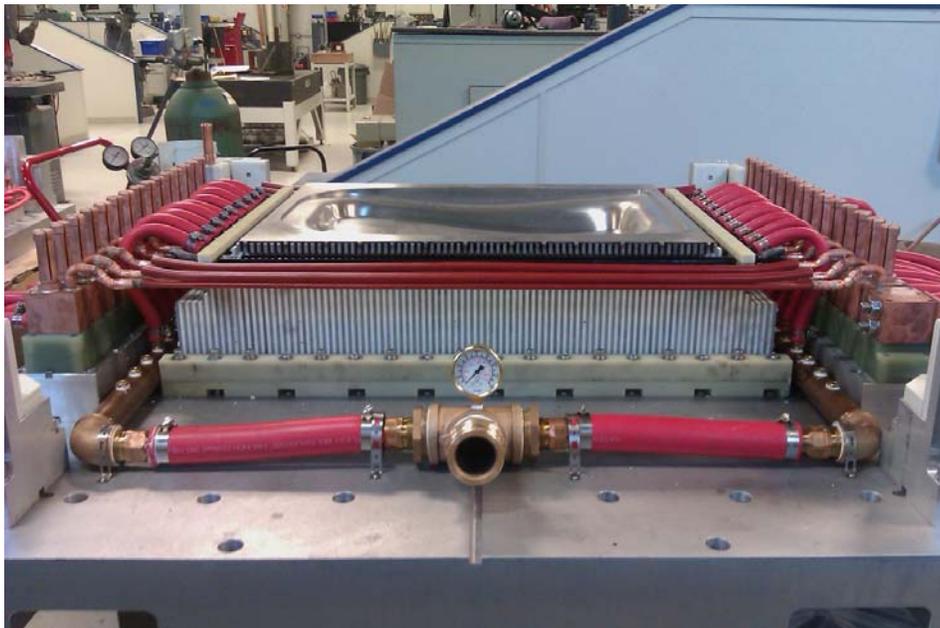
Front view of the completed lower tool half showing the quick disconnect for the quenching air feeding the individual quenching tubes
